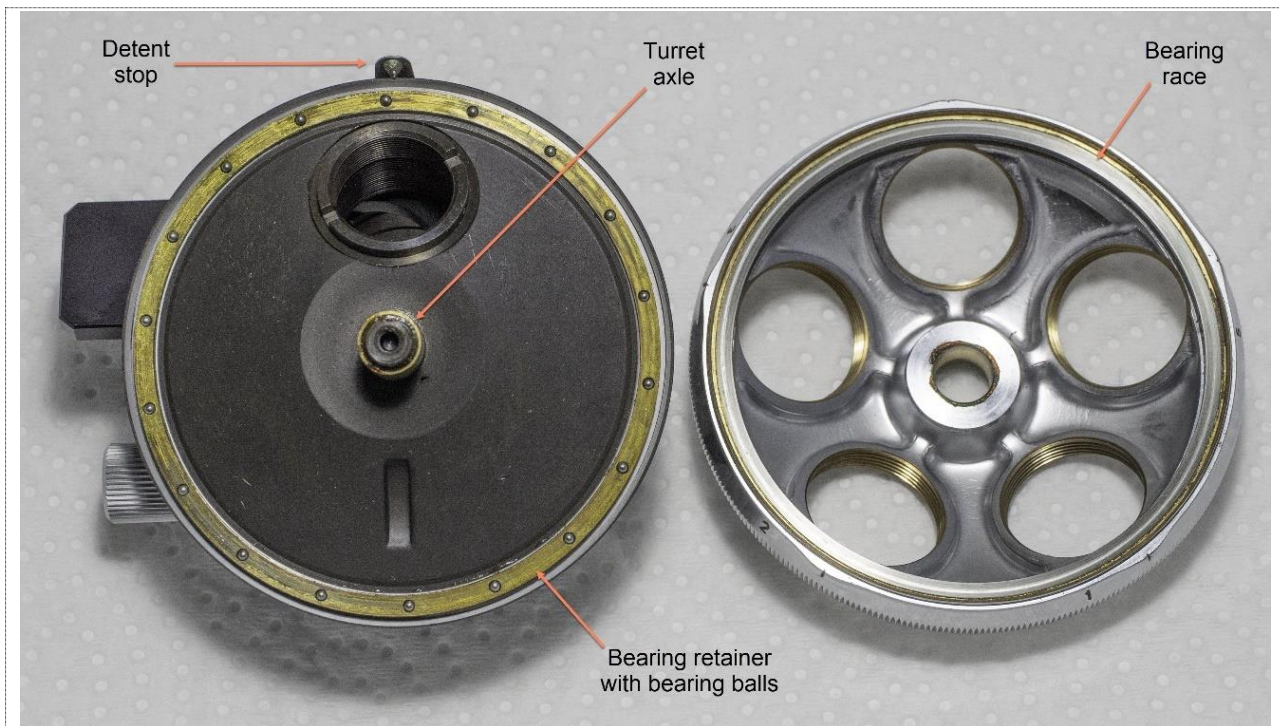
Turret (right) removed from the nosepiece base (left). The large ball bearing retainer (brass) with most of the bearing balls sits on the nosepiece base's race.
